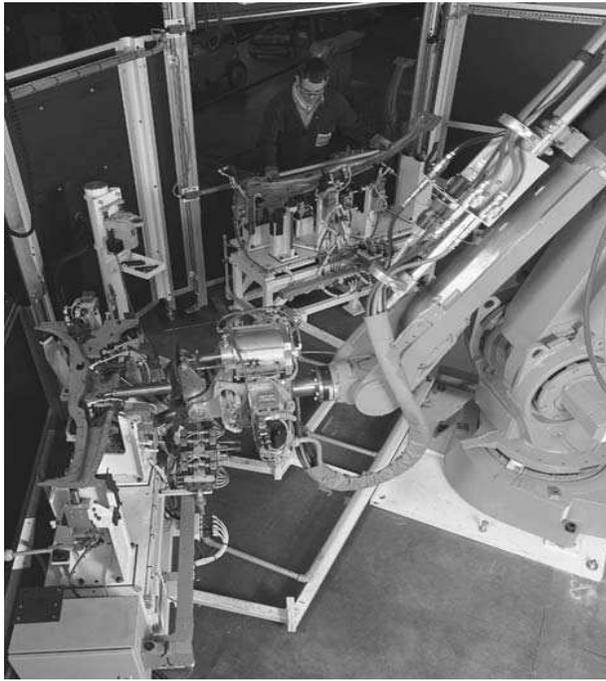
Modern robotic resistance spot welding cell. The robot welds on one jig while the operator unloads/loads the second jig. Courtesy of British Federal
